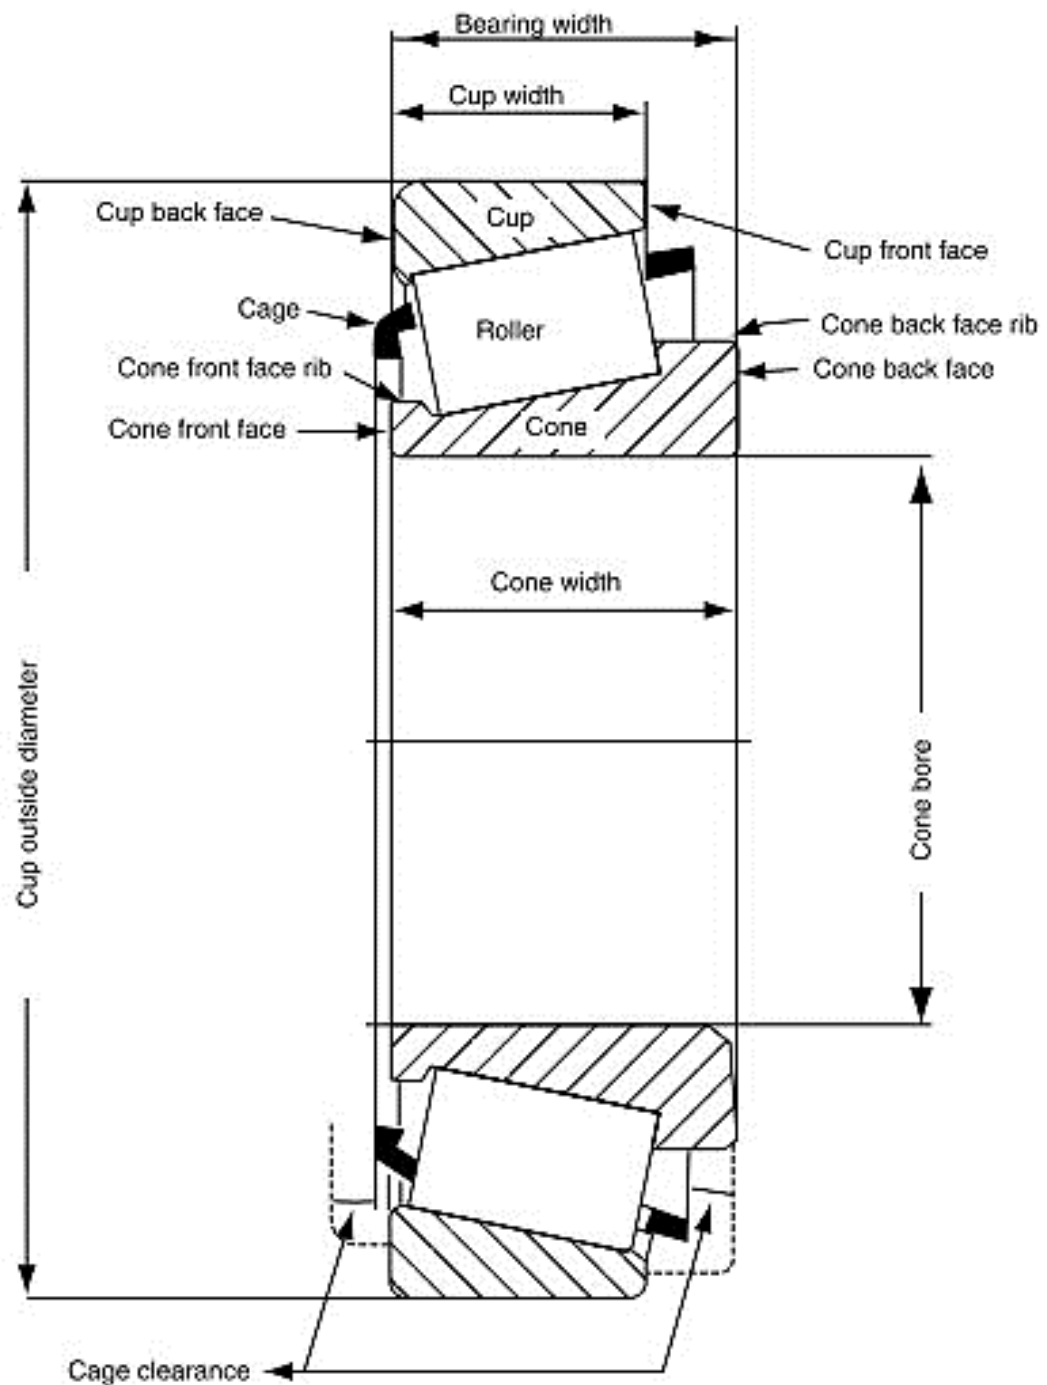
Schematic drawing of a tapered roller bearing indicating nomenclature [8]
